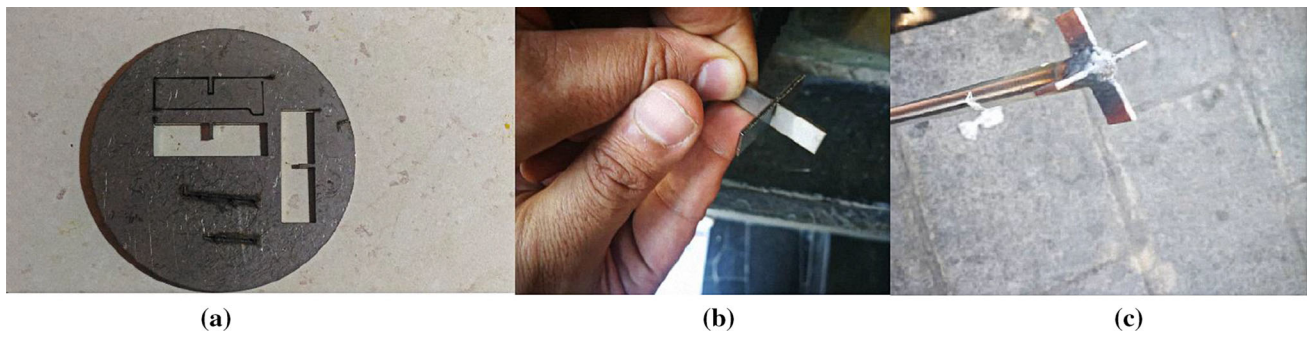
The mechanical stirrer manufacturing process cutting with argon laser (a), inserting cut sheets (b), and welding sheets (c)
